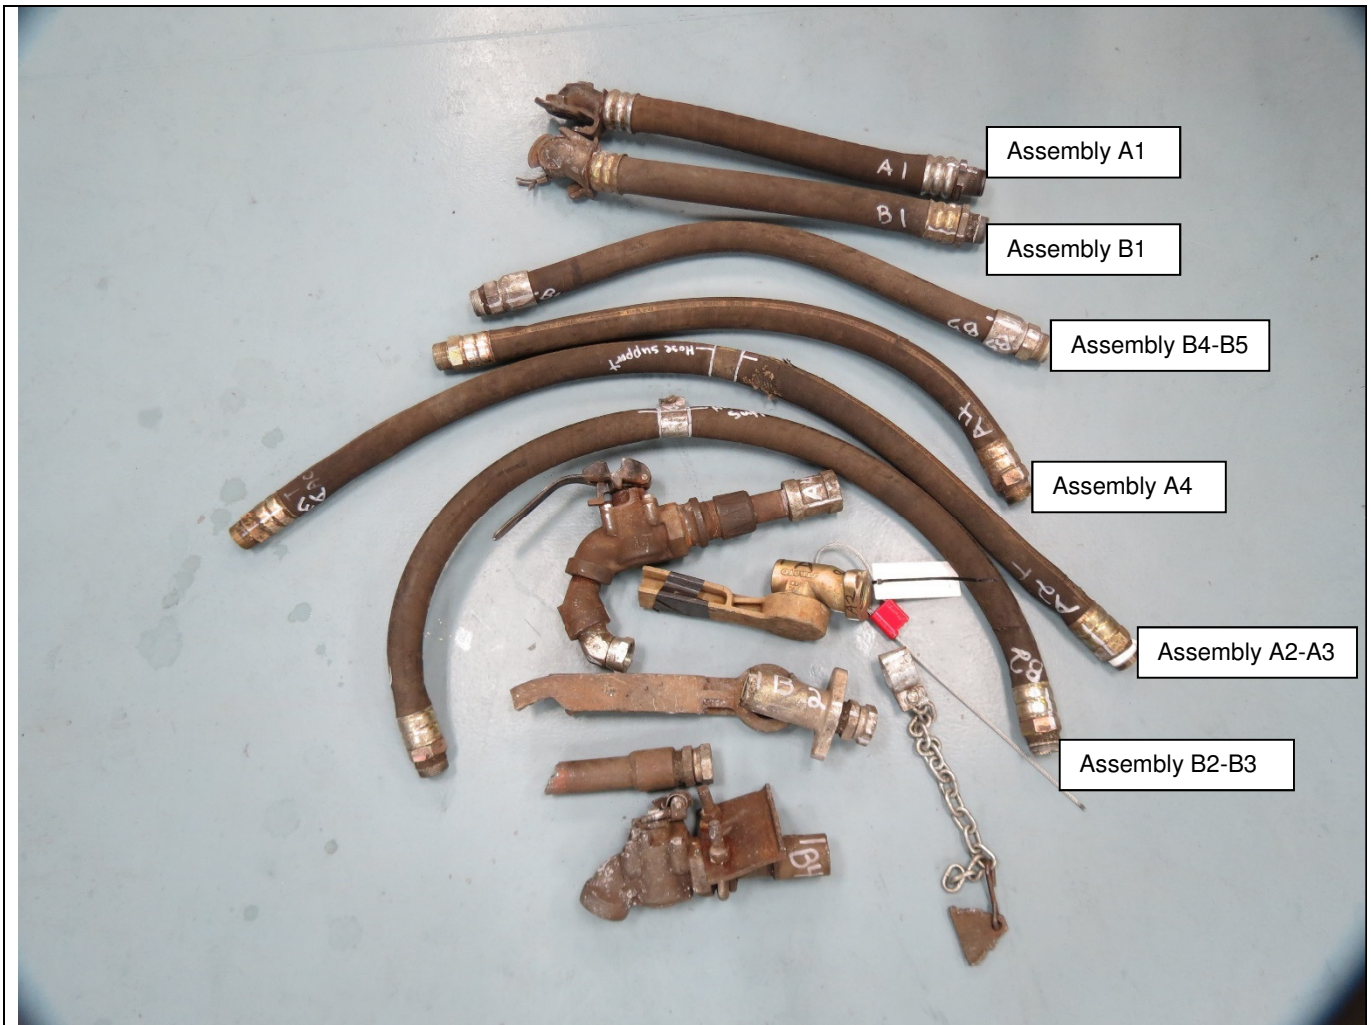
Received assemblies and components. The assemblies will be referred to throughout the report as labeled in the Figure above.
